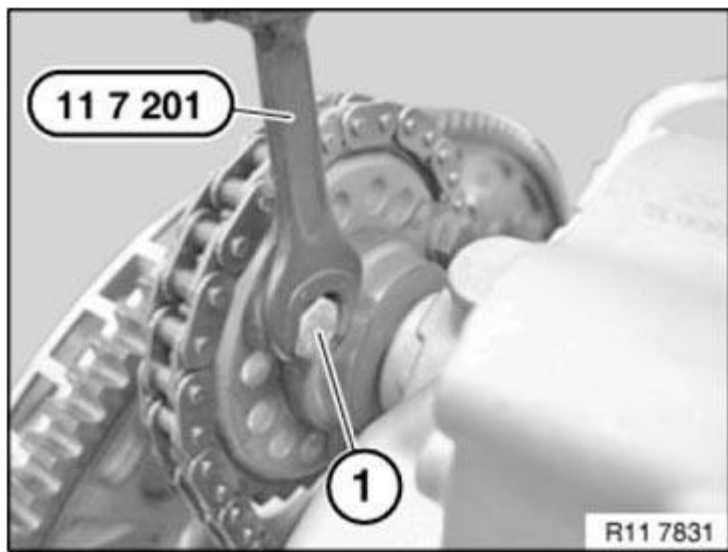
Removing Nuts Using Special Tool 11 7 201
